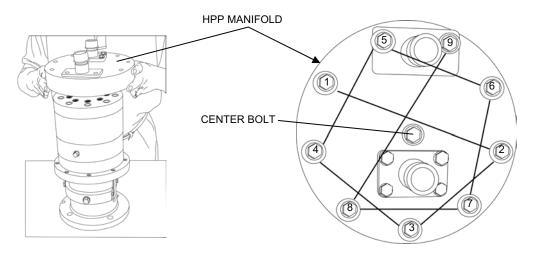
HPP Manifold Installation and Bolt Torque Sequence.
